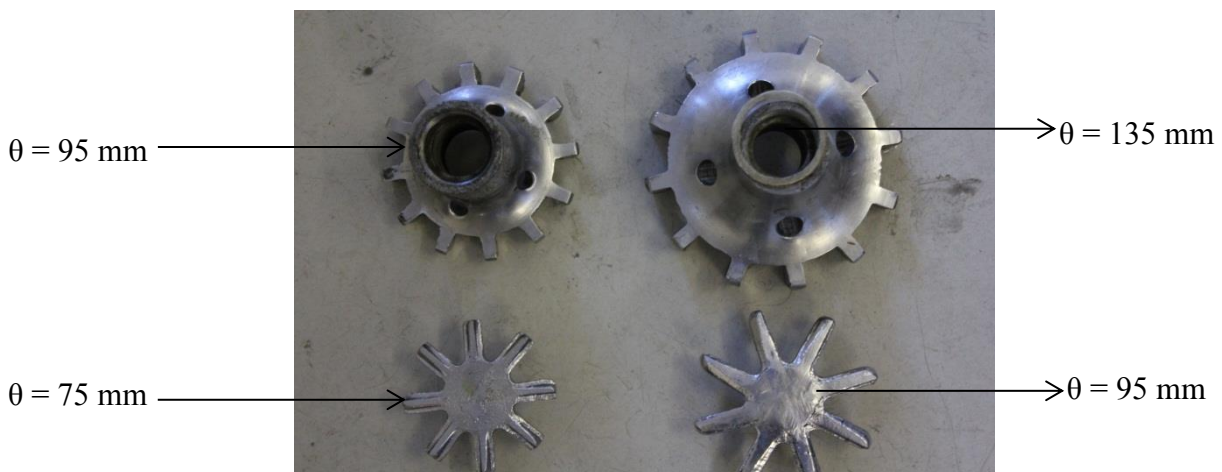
Impeller sizes/Shaft casings: Small and Large (from left to right)
